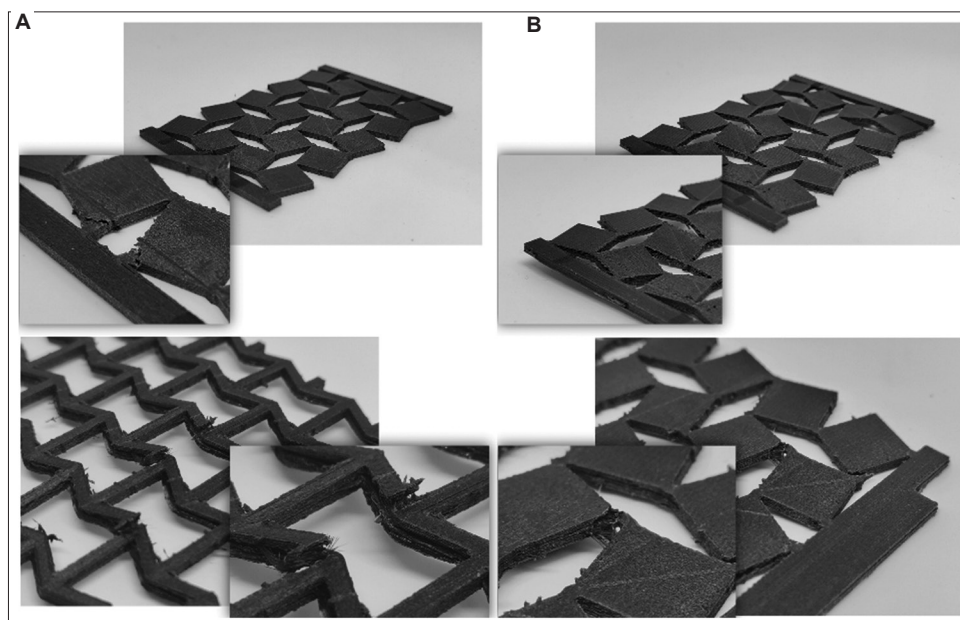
Failures in test specimens. (A) The fracture occurred in the test specimens without infilled continuous fiber. (B) The warpage deformation occurred in the fiber-reinforced test specimens.
